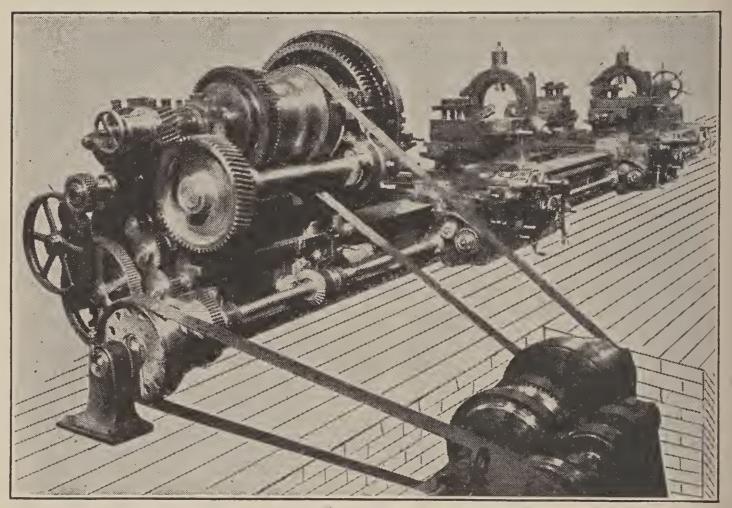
Heavy duplex boring and turning lathe, Witkowitz Works.
